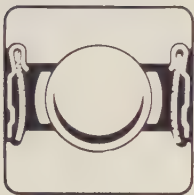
Fixed, Notch Rubbing-Type Seal: This is a general purpose, narrow width seal similar in principle to Fig. 1d except that the sealing member is generally a stamped rubber diaphragm held in place by a metal shield member. The speed and temperature limits of this seal are governed by the properties of the synthetic rubbering washer.
